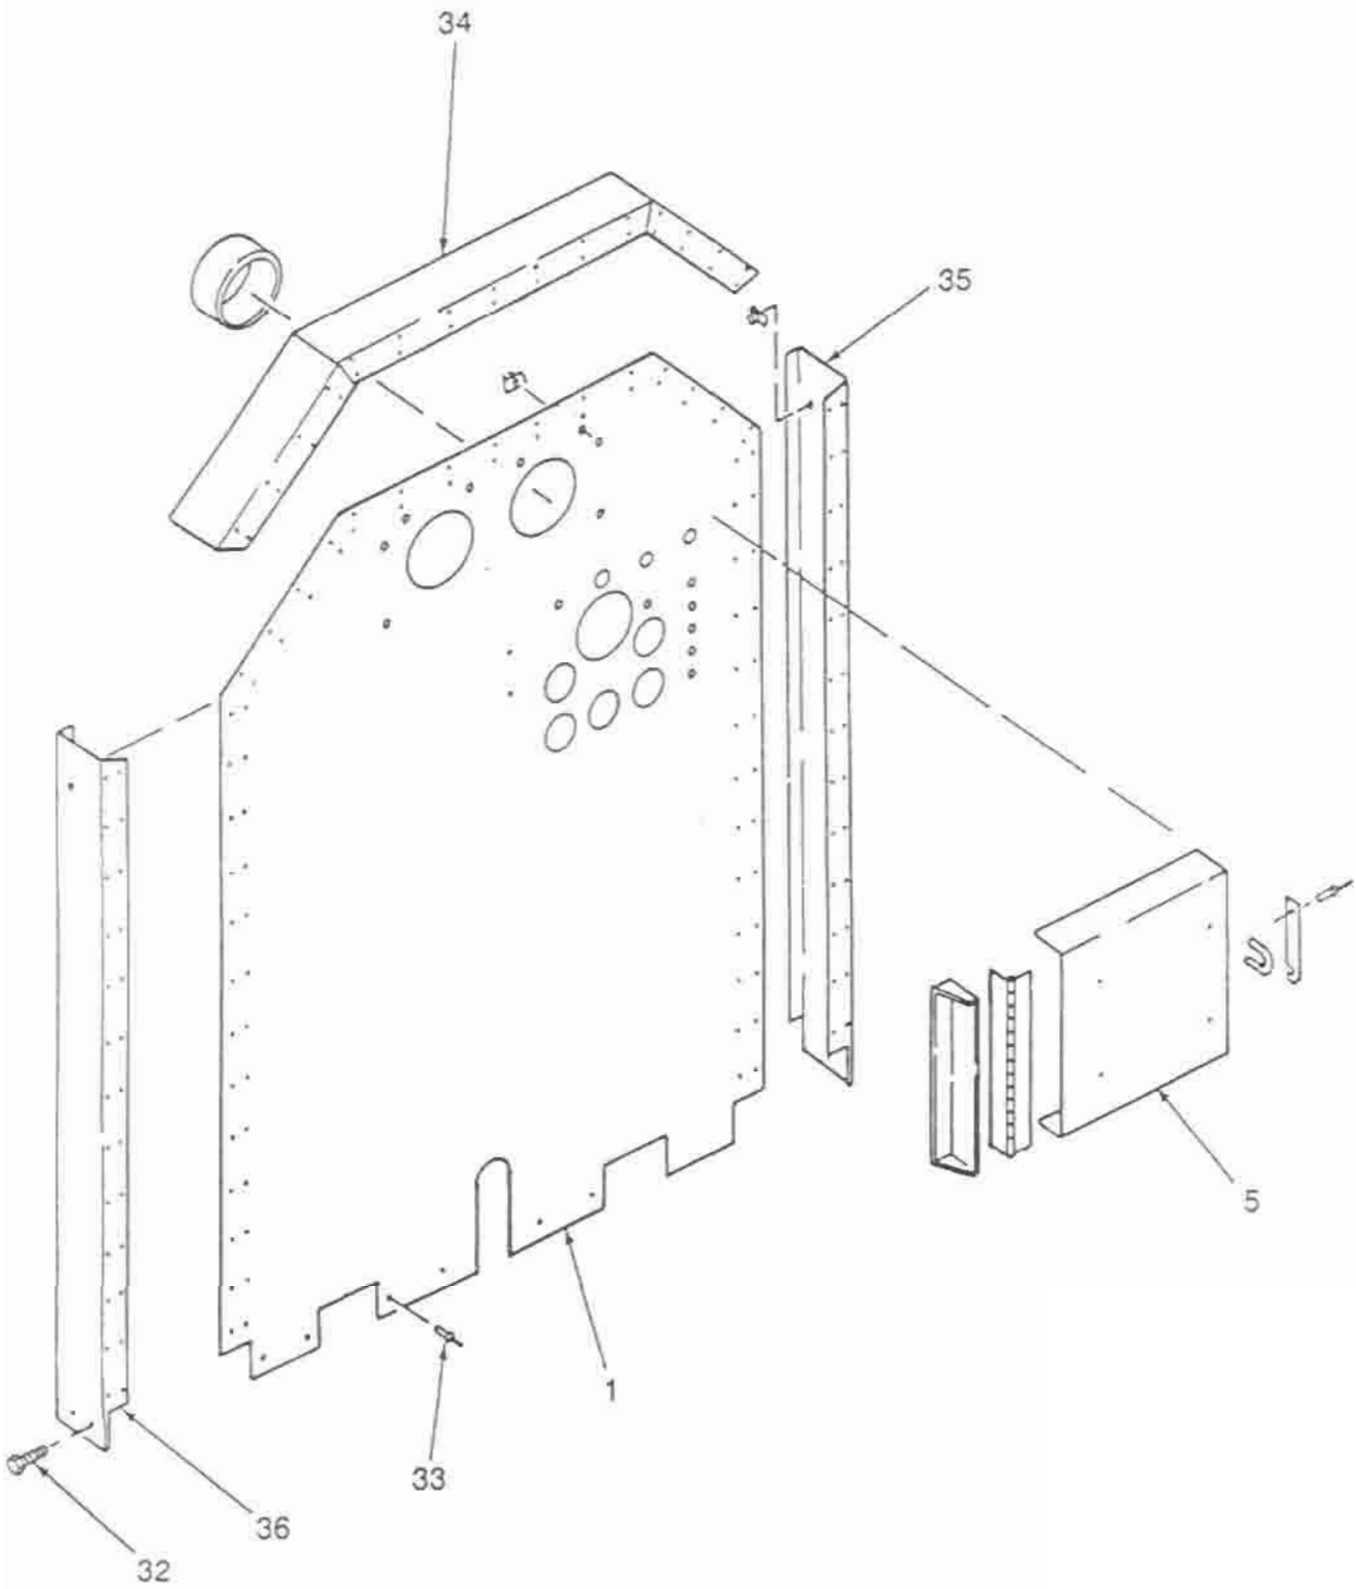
Panel Assembly Rear (Sheet 1 of 4)
